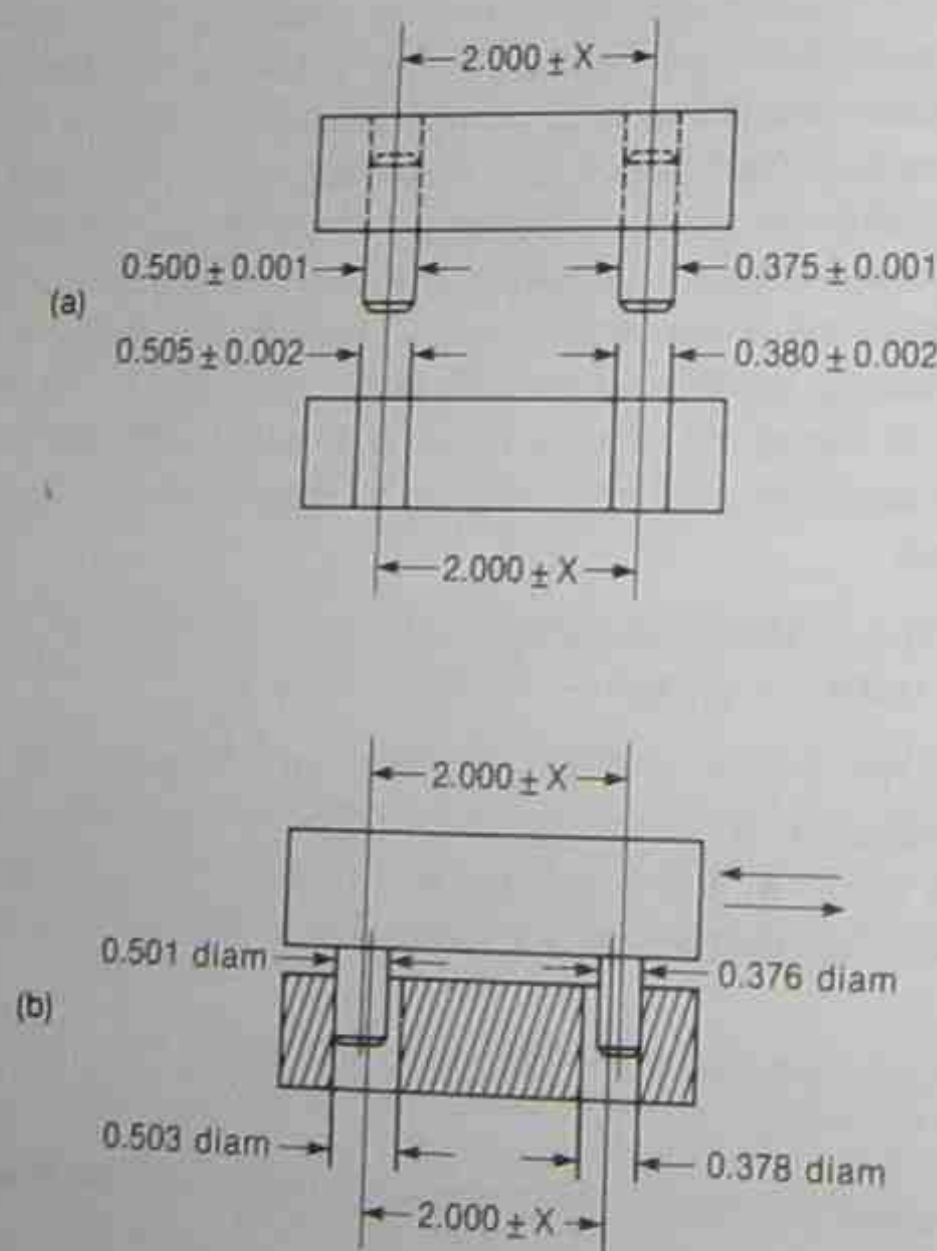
(a) Sketch of two components prior to assembly and (b) an assembly using one combination of extreme conditions.
